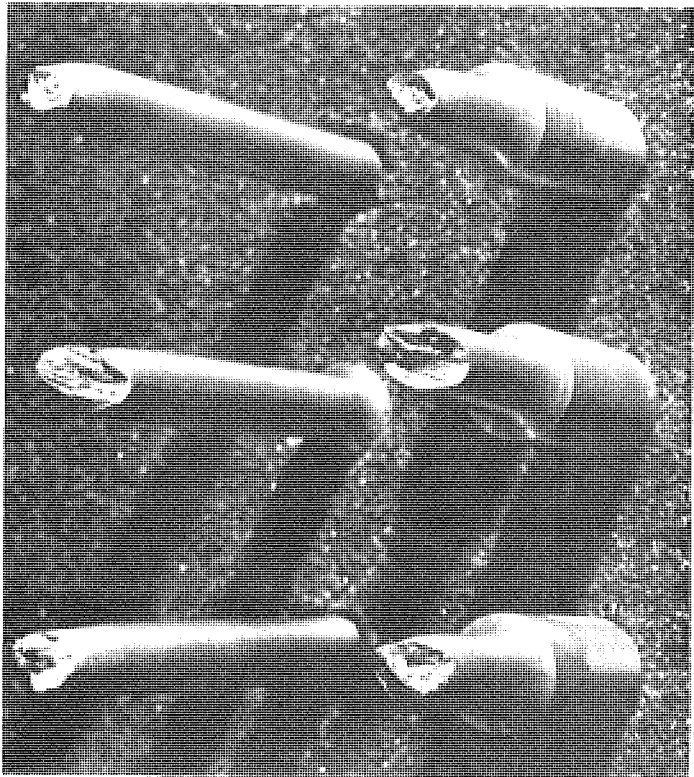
Fractured tensile specimens from an electroslag weld (ES 588-B2a) showing the effect of the weld metal structure on the mode of failure. The first two specimens on the left show the type of fracture occurring in Zone 2 weld metal, which fails along the prior austenite grain boundaries. The specimen on the right shows the common "cup and cone" failure mode exhibited by the Zone 1 weld metal.
